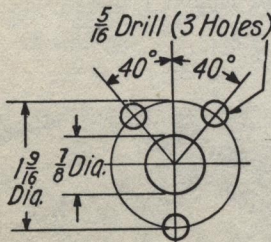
DRILLING PLAN FOR TYPE W INSTRUMENT AND CONTROL SWITCHES
